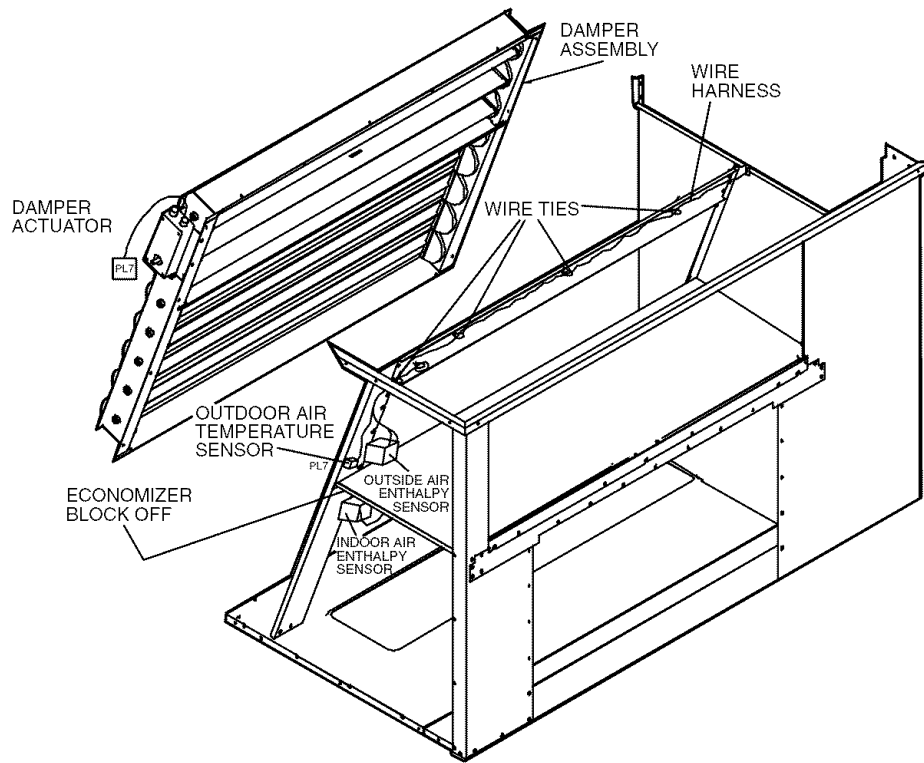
EconMiSer IV Component Locations (Exploded View)
